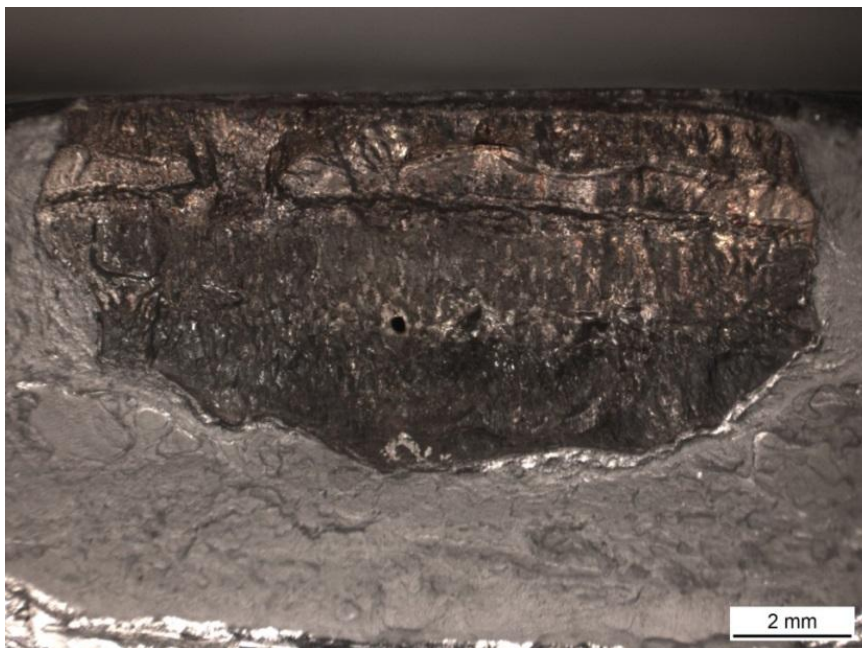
Photograph of the surface of the crack in test piece MF A. [1]
